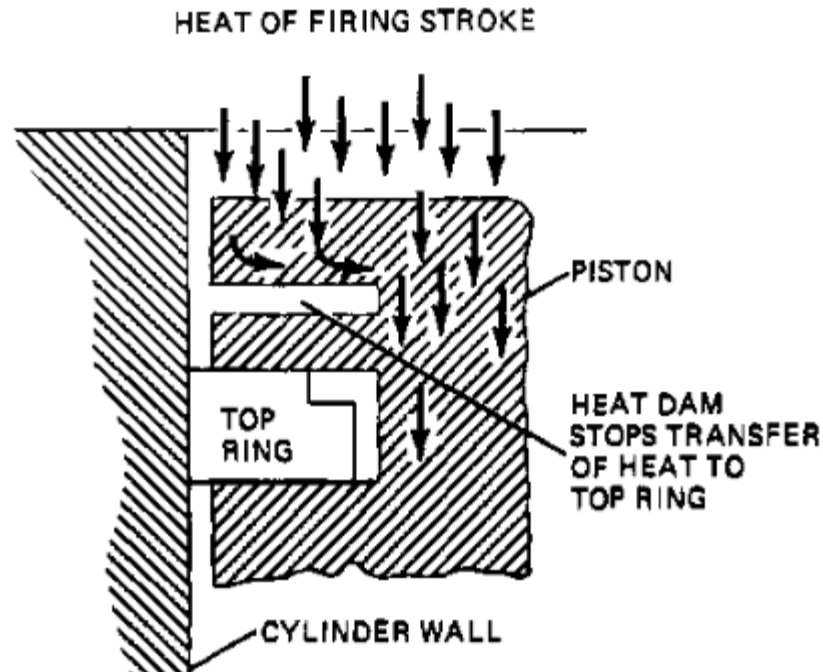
Heat transfer in the piston ring and liner assembly.
